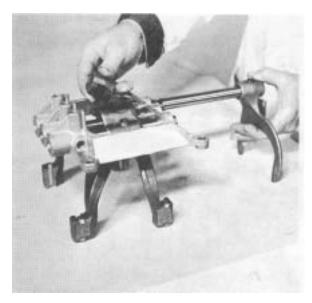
Remove 1st & Reverse shift fork, rod and lug from shift rod support.
